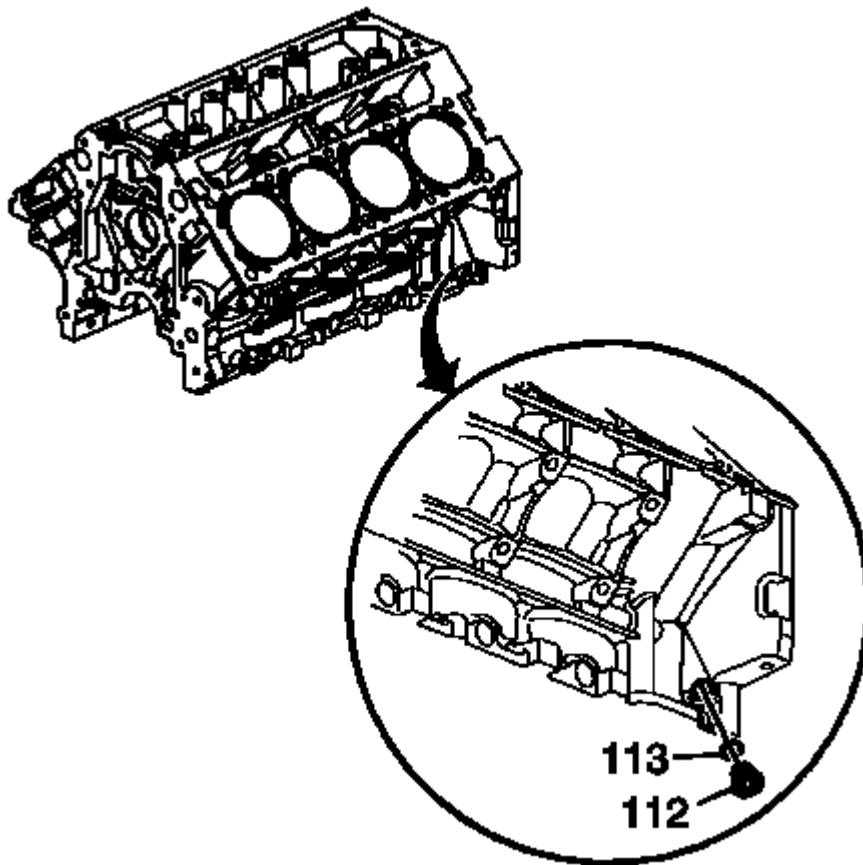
Engine Block Left Rear Oil Gallery Plug & Seal
